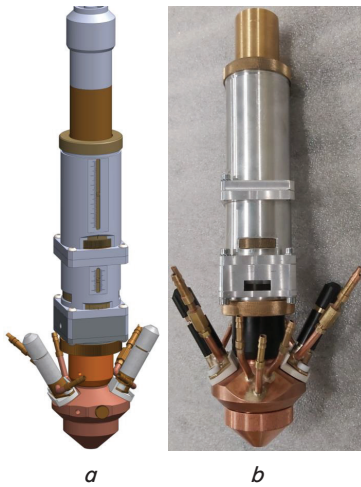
Integrated plasmatron for laser-plasma cutting: a – three-dimensional model; b – physical appearance
